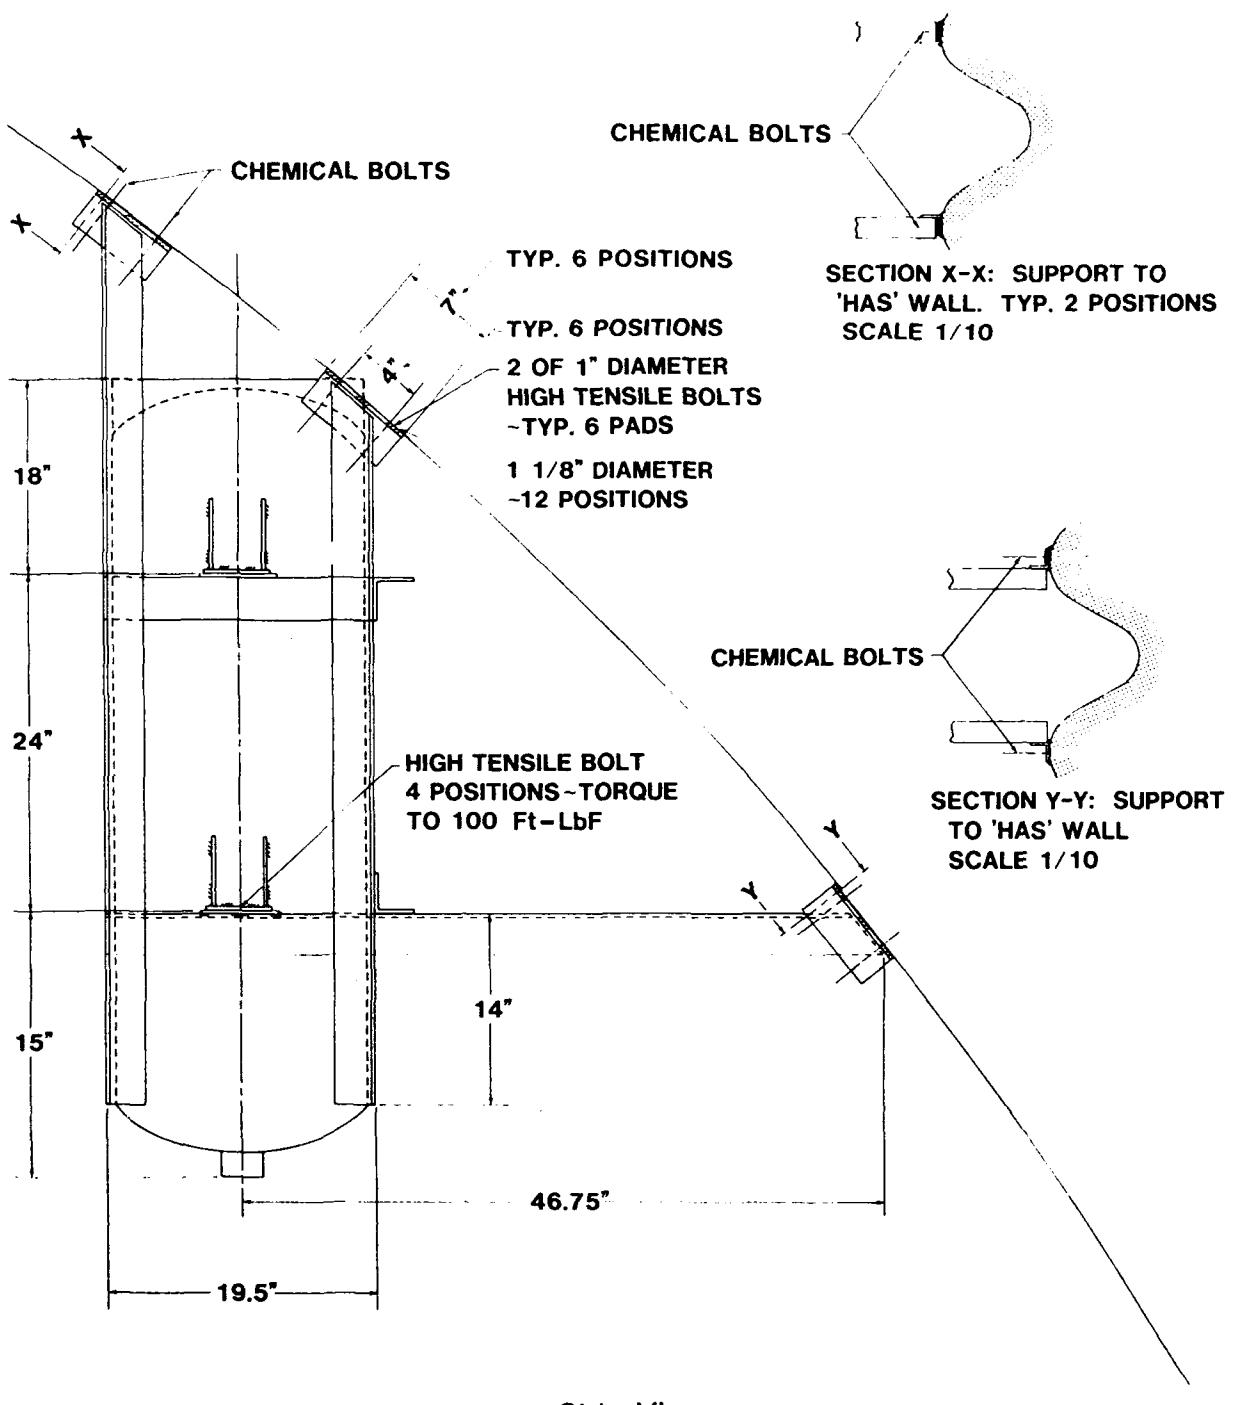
Company 'C' Cylinder Assembly without Shock Mount.
